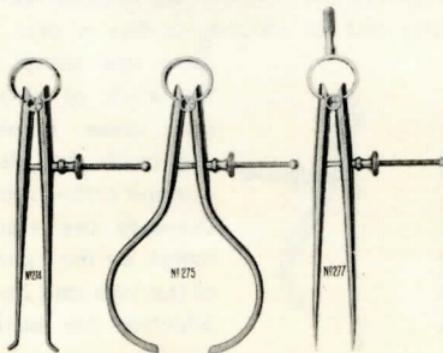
Inside and outside Calipers and Dividers are typical "contact" measuring tools.
